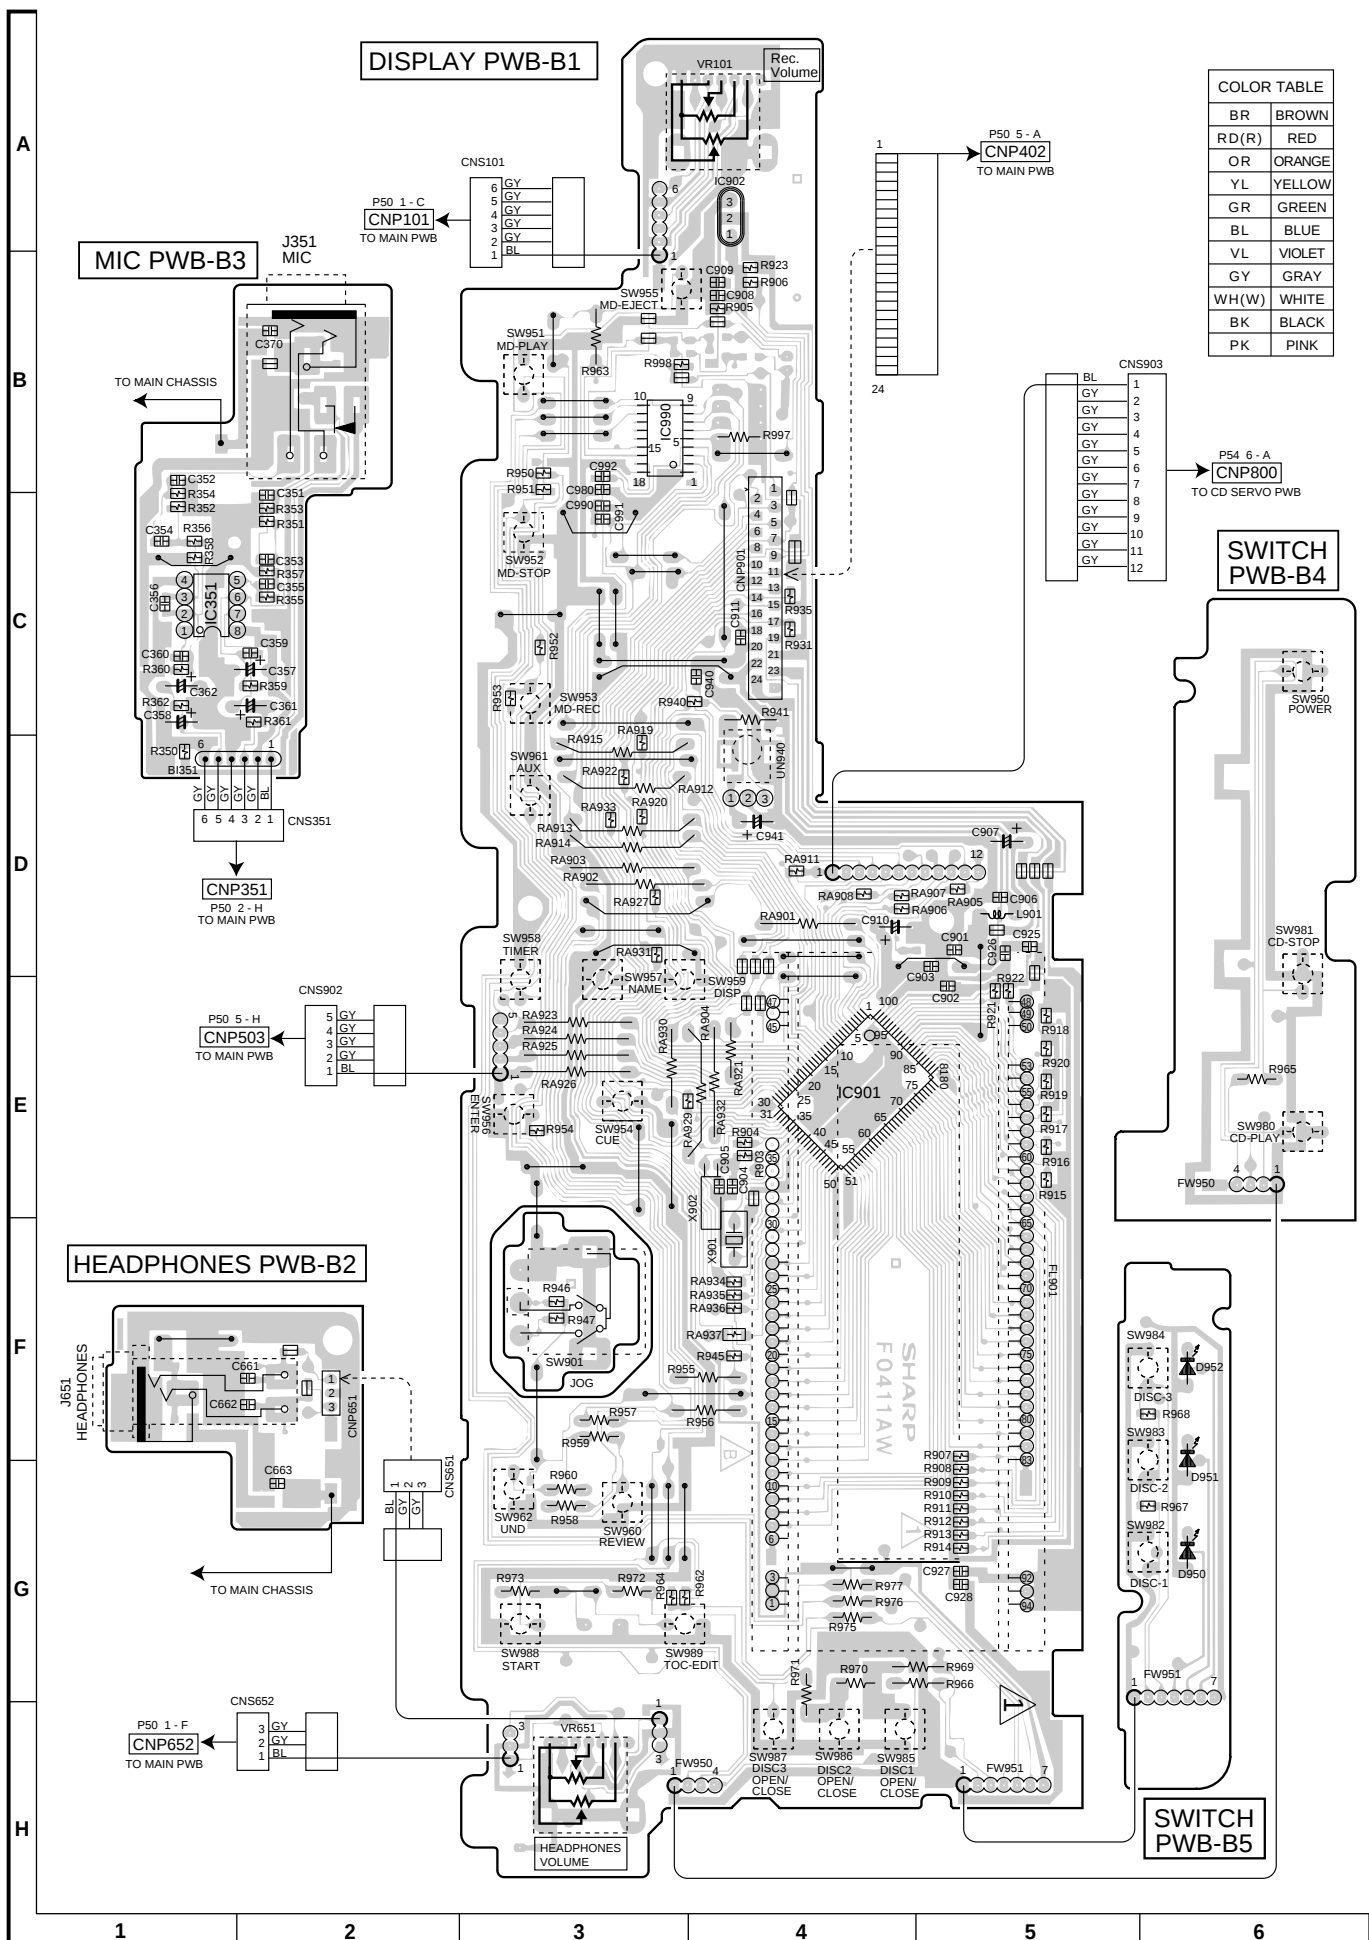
WIRING SIDE OF P.W. BOARD (3/8)
